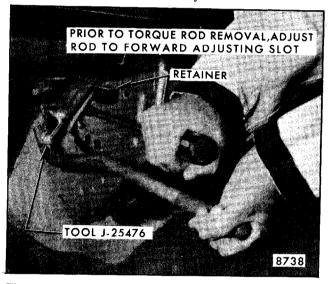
Torque Rod Tool Engagement - Cadillac K Style
